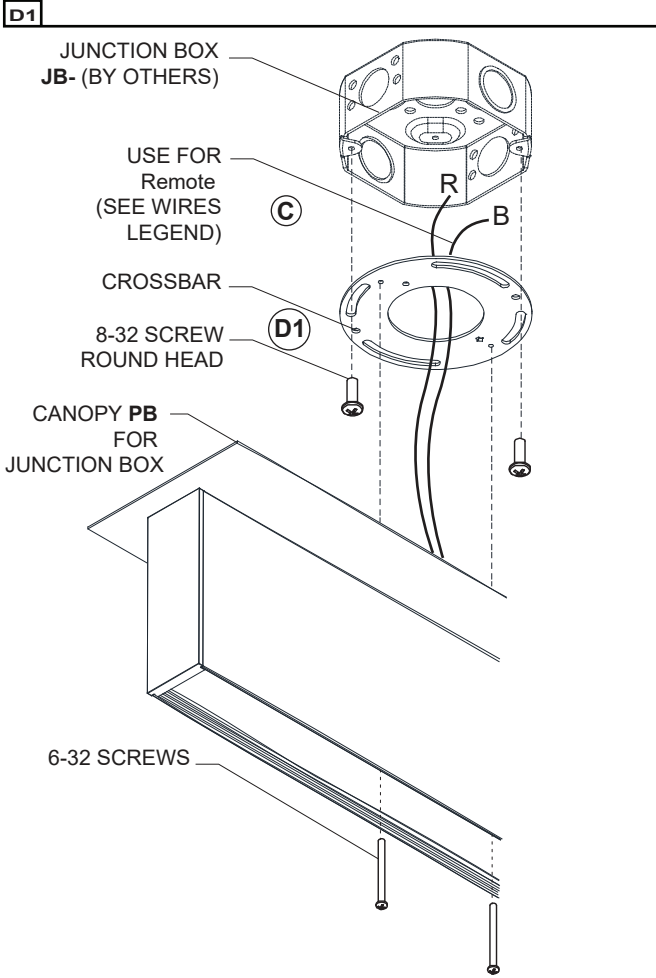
CANOPY INSTALLATION AND ELECTRICAL
